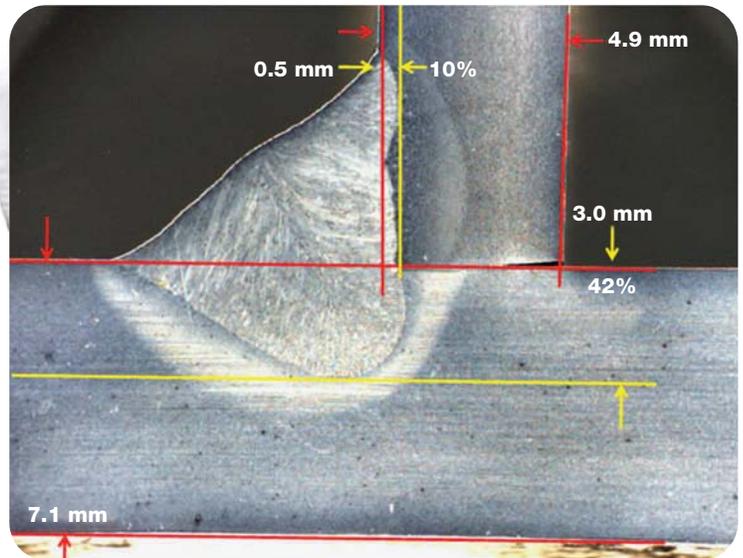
An example of weld penetration depth measurements using the Welding Expert.
